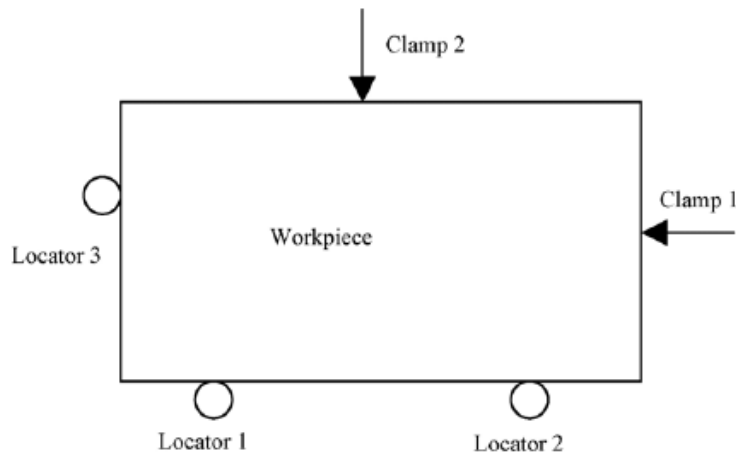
Fixture Layout Scheme, 3-2-1, for 2D work piece
